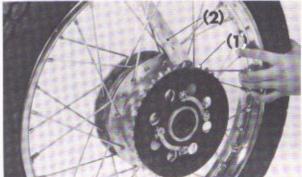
(1) Final driven sprocket (2) Piece of
